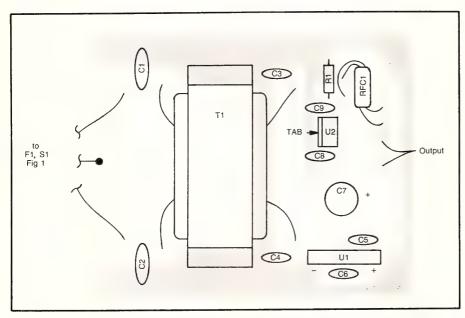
Parts-placement guide for the 12-V power-supply PC board. Parts are placed on the nonfoil side of the board; the shaded area represents an X-ray view of the copper pattern. Component outlines are not necessarily representative of the shapes of the actual parts used.
